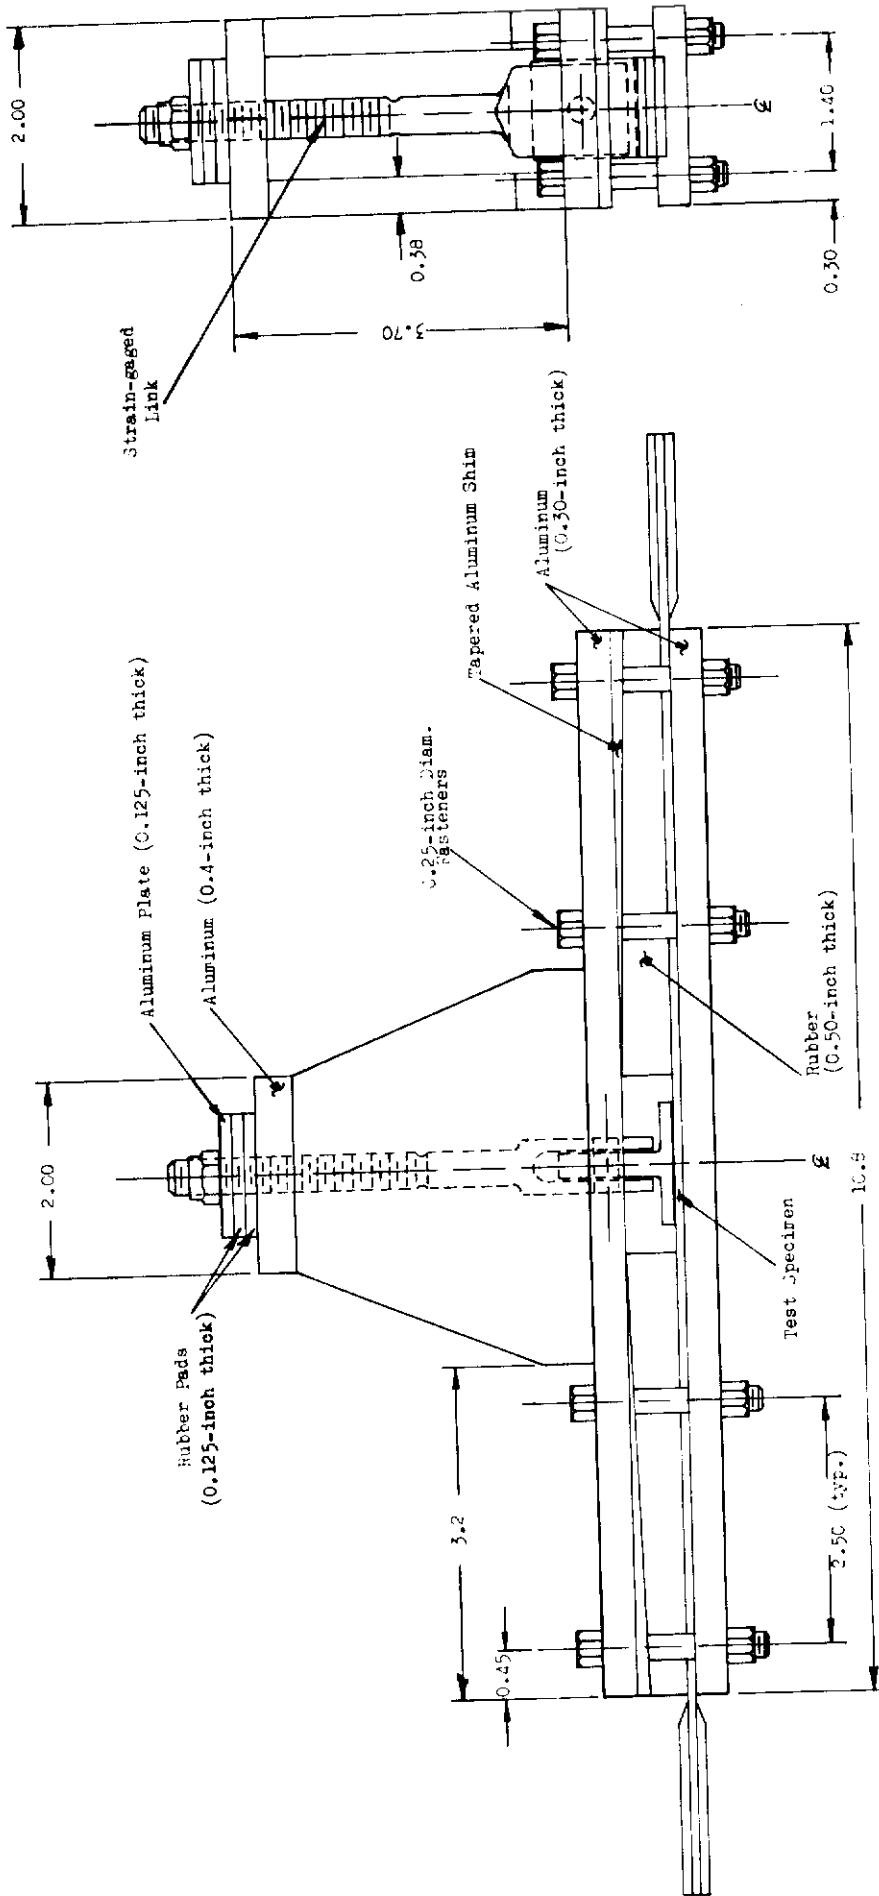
TEST FIXTURE FOR CONFIGURATION C AND CONFIGURATION F SPECIMENS
